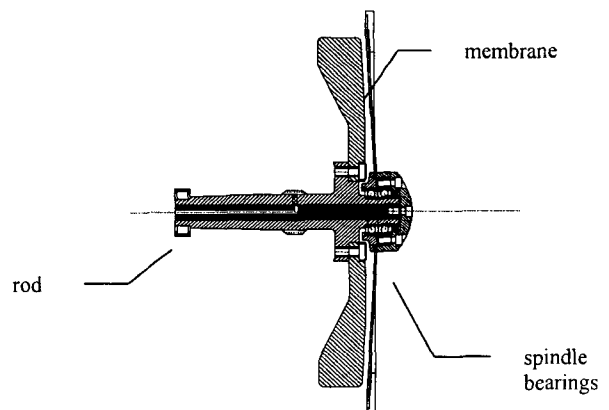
Spindle bearing, radial supported by a membrane and axial supported by a rod.
